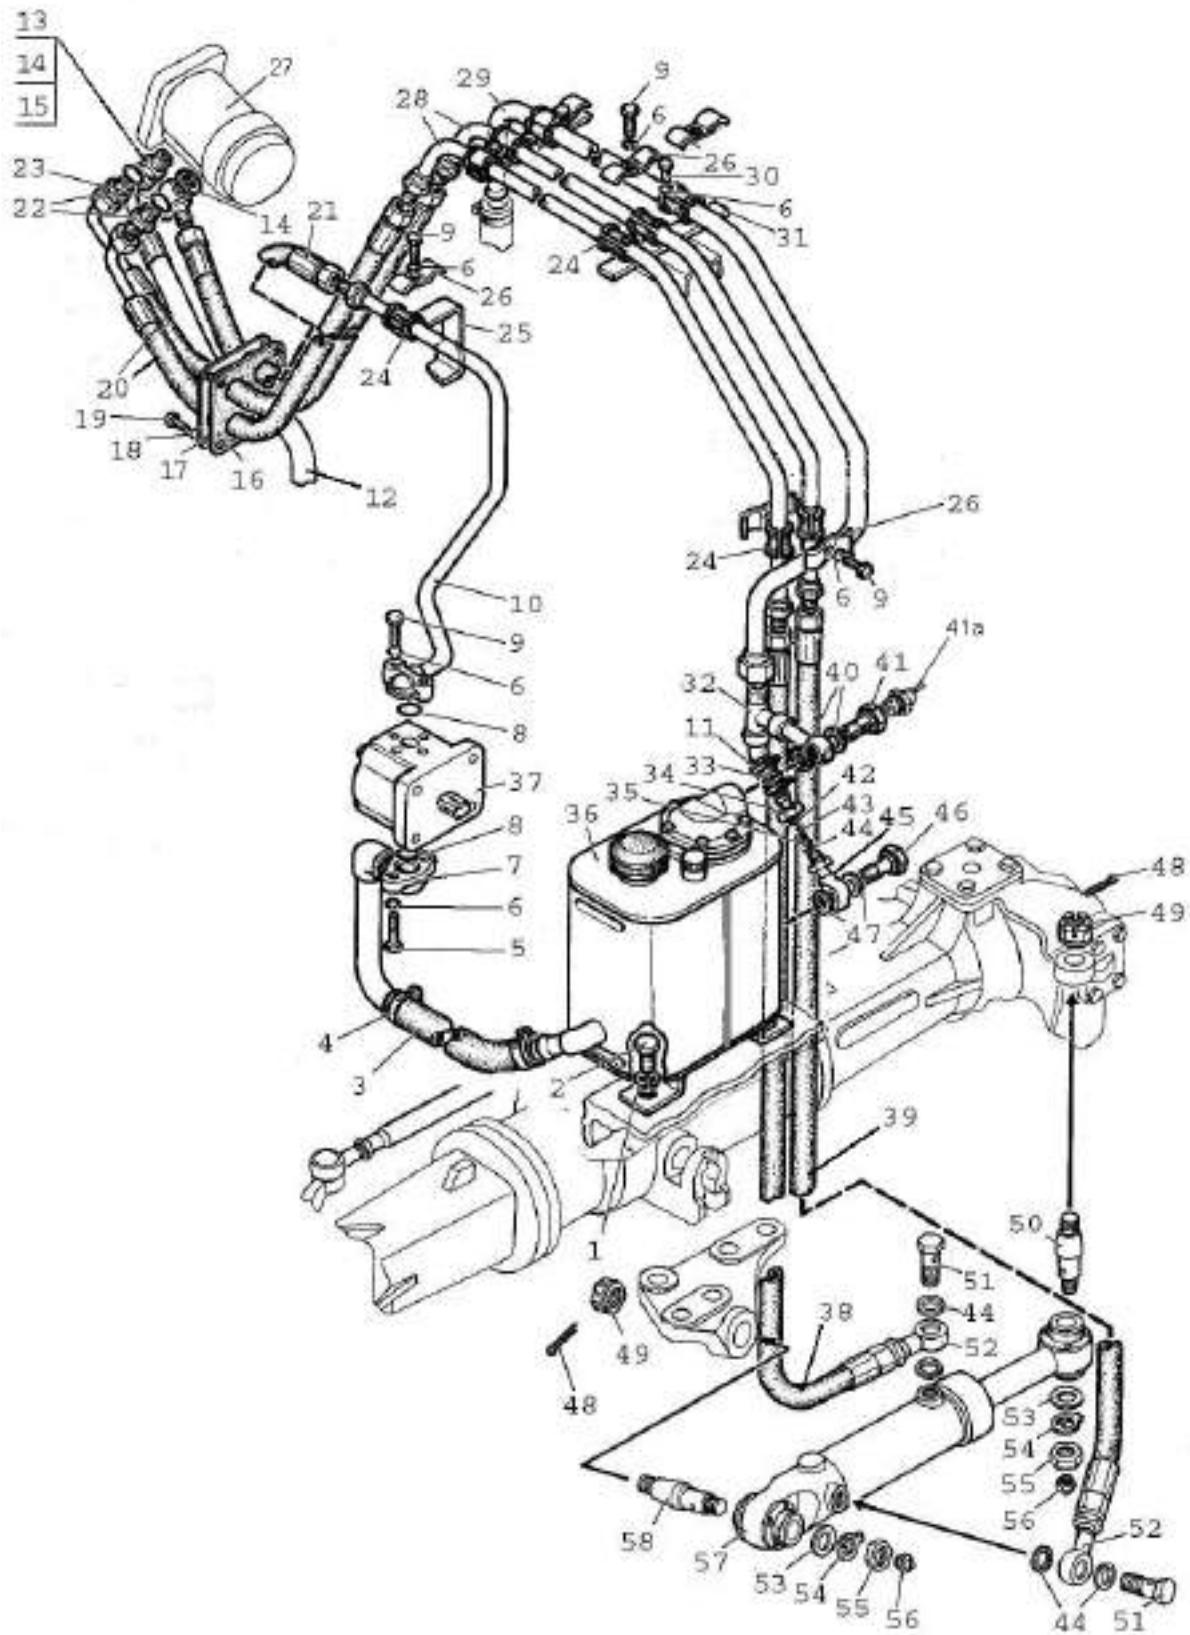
Steering with the FDA 822-2300020-04 and separate tank
